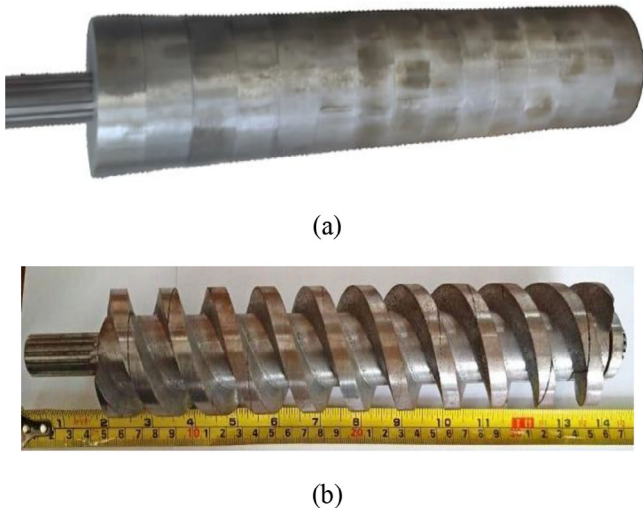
| The SPM rotor: (a) glued discs and axis; and (b) machined trapezoidal thread.
